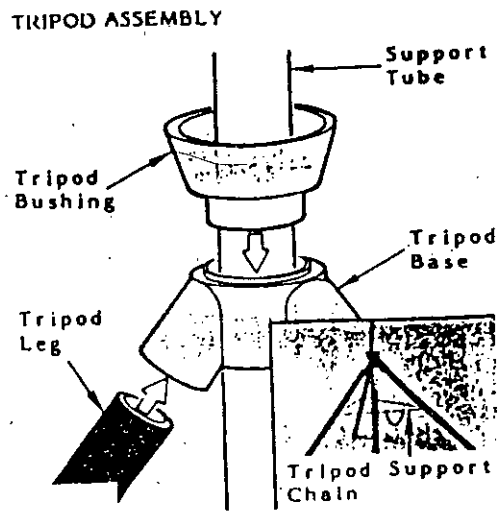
TRIPOD ASSEMBLY SHOWING THE TRIPOD BASE ARRANGEMENT
